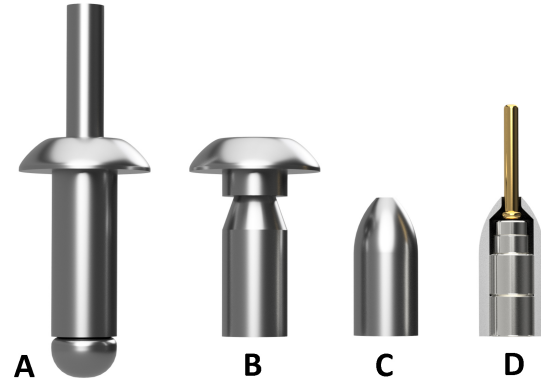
The rivet shaping process.(A) The mandrel is removed (B) The body is crimped (C) The body is further shaped and sanded (D) final cutaway view
